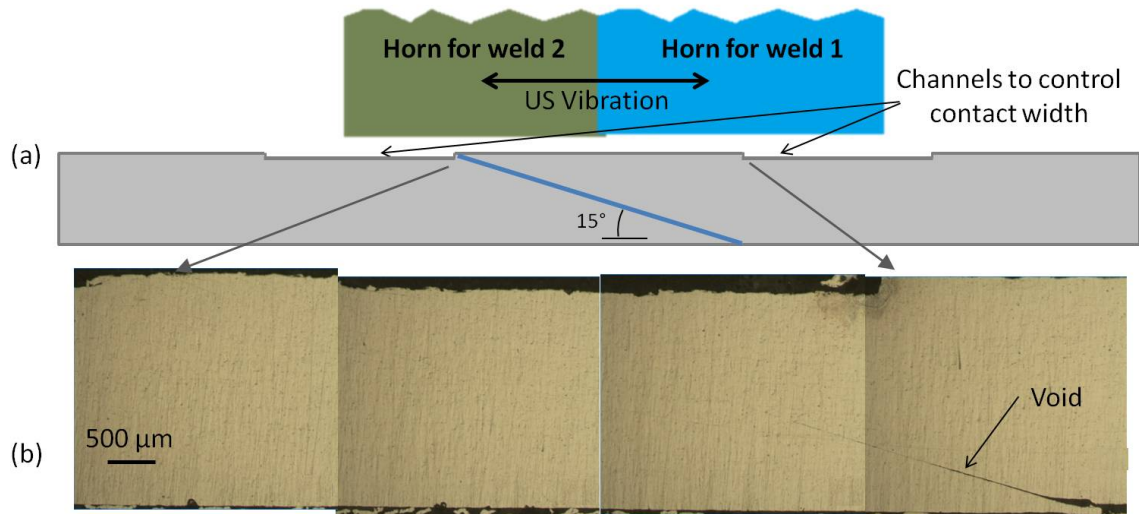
Scarf joint with side by side welding: (a) schematic and (b) cross section.
